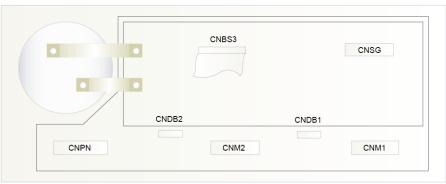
Parts Configuration of HSXY2 Drive Unit
